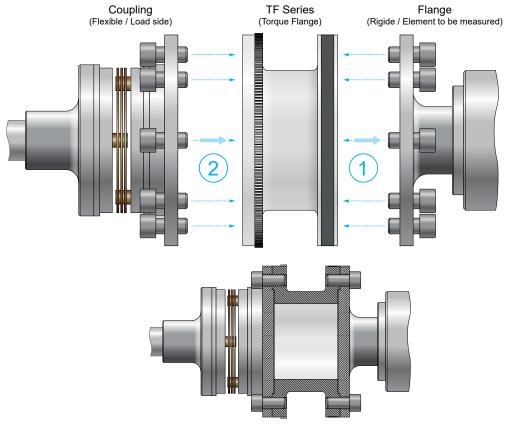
Recommended assembly process for TF 318 - TF 320
